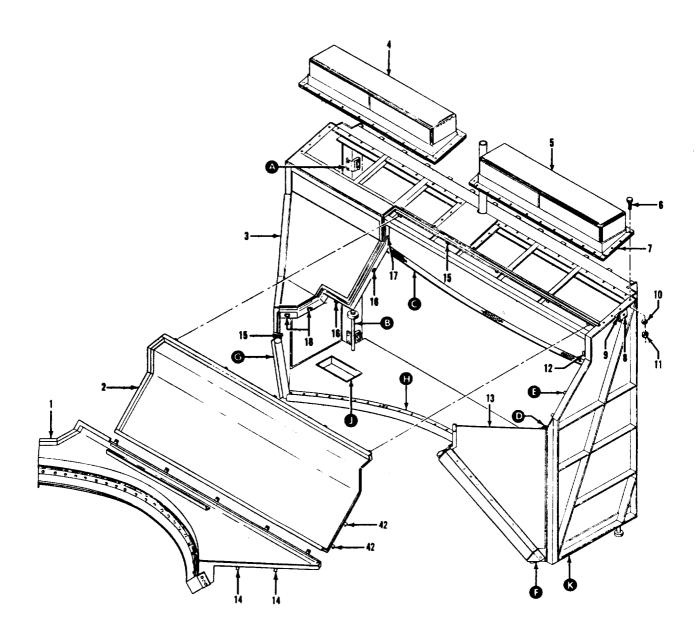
Hood Adapter Assembly (Sheet 1 of 6)
